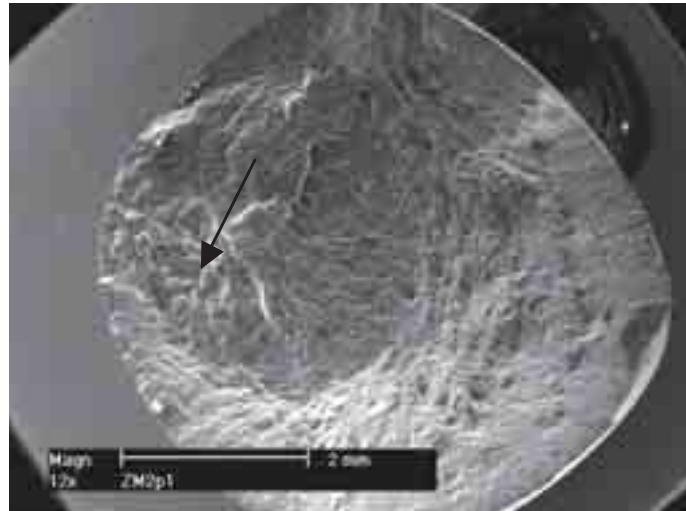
Fatigue fracture image of test specimen of 5059 alloy welded by GMA. Fatigue zone (marked with an arrow) and plastic fracture zone are visible
